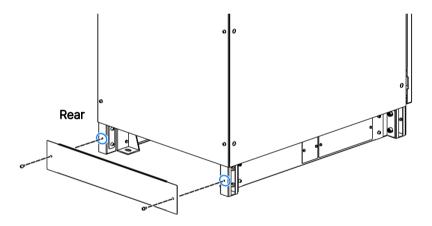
40/50kVA UPS \_ Install the Rear Rodent Shield at the Rear Bottom
